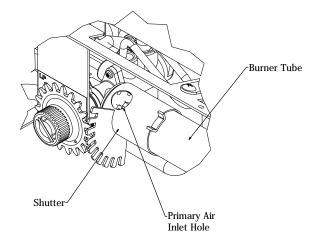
Primary Air Inlet Slot on Burner Tube
